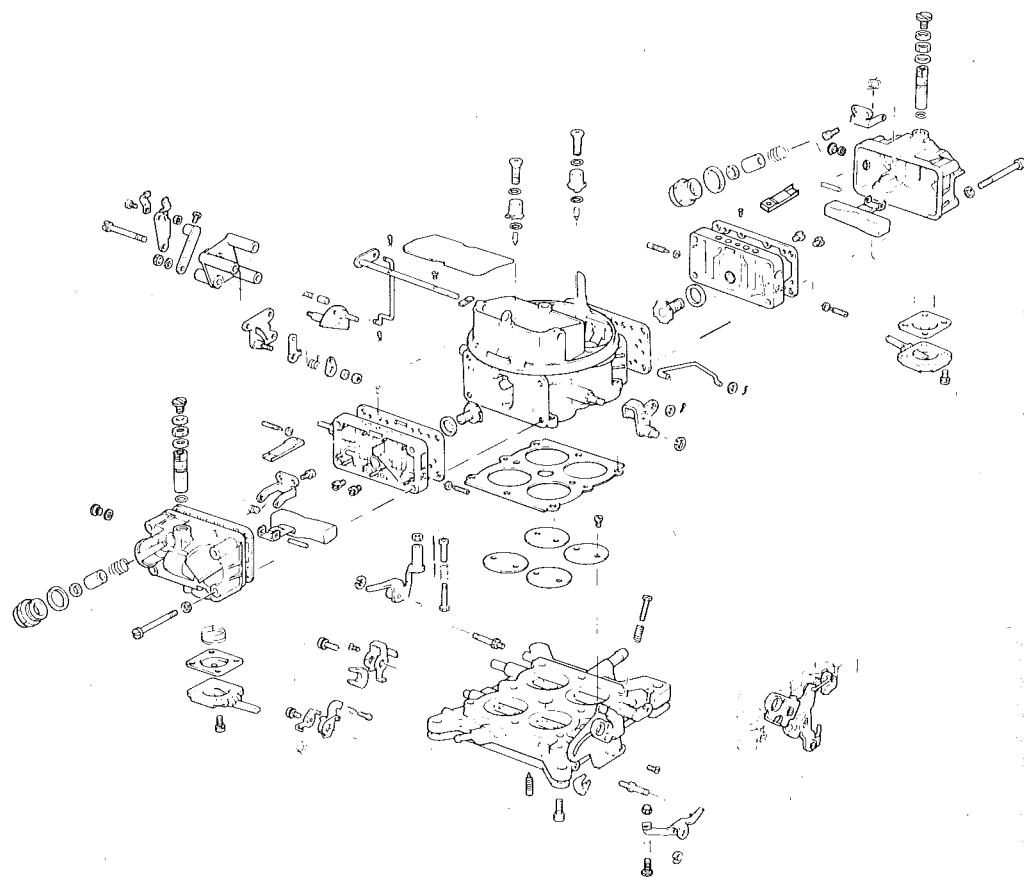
Exploded view of a Holley 4150 four-barrel carburetor. Courtesy Colt Industries.
